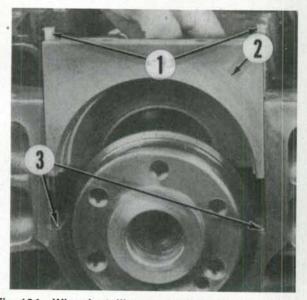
When installing rear main bearing cap (2), side seals (1) should protrude slightly above face of cap as shown. Apply light coat of sealing compound to block and cap mating surfaces (3).
